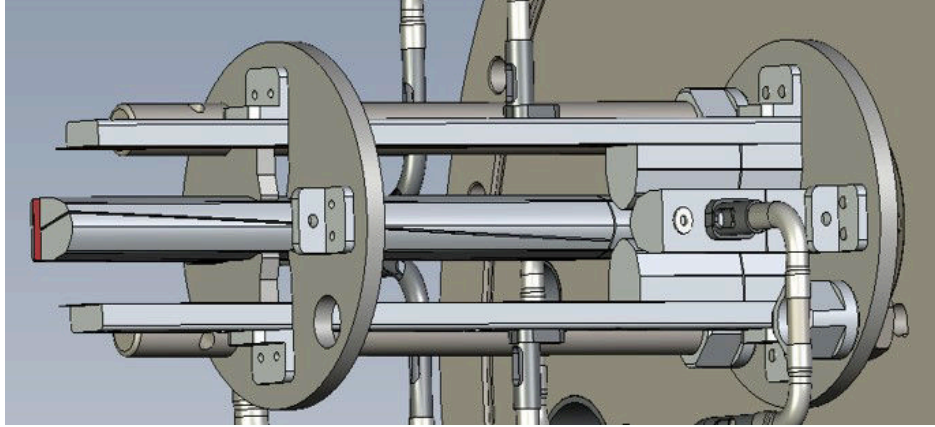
Closeup design image of prototype crosscut electrode geometry for cooler drag field.
